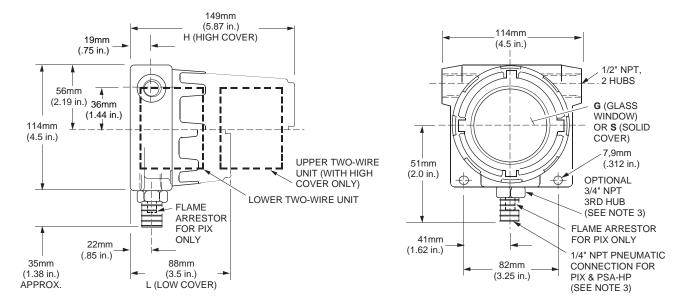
Outline Dimensions of Explosion-Proof Enclosures for Two-Wire Units
